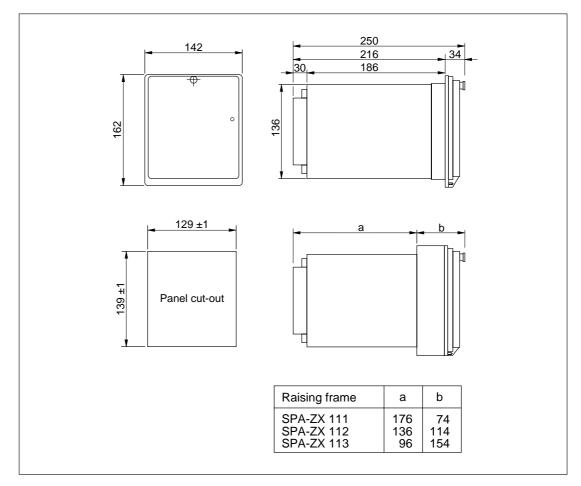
Dimension and mounting drawings for frequency relay SPAF 140 C.
